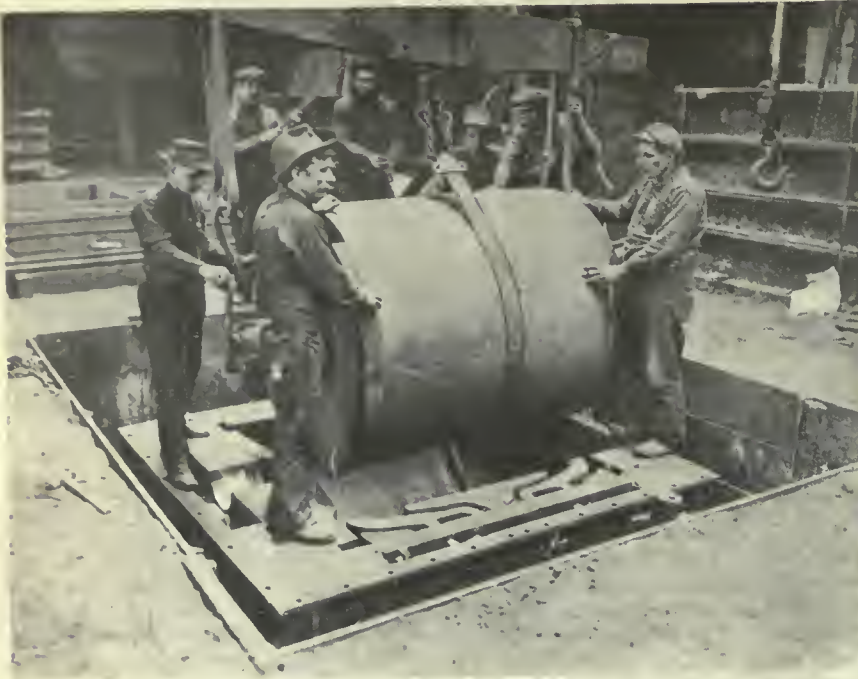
CORE BEING LOWERED INTO PLACE. SEE COPE TO RIGHT SHOWING MANNER IN WHICH SECTIONS ARE BUILT TOGETHER, ALSO SHOWING SYSTEM OF VENT HOLES.
